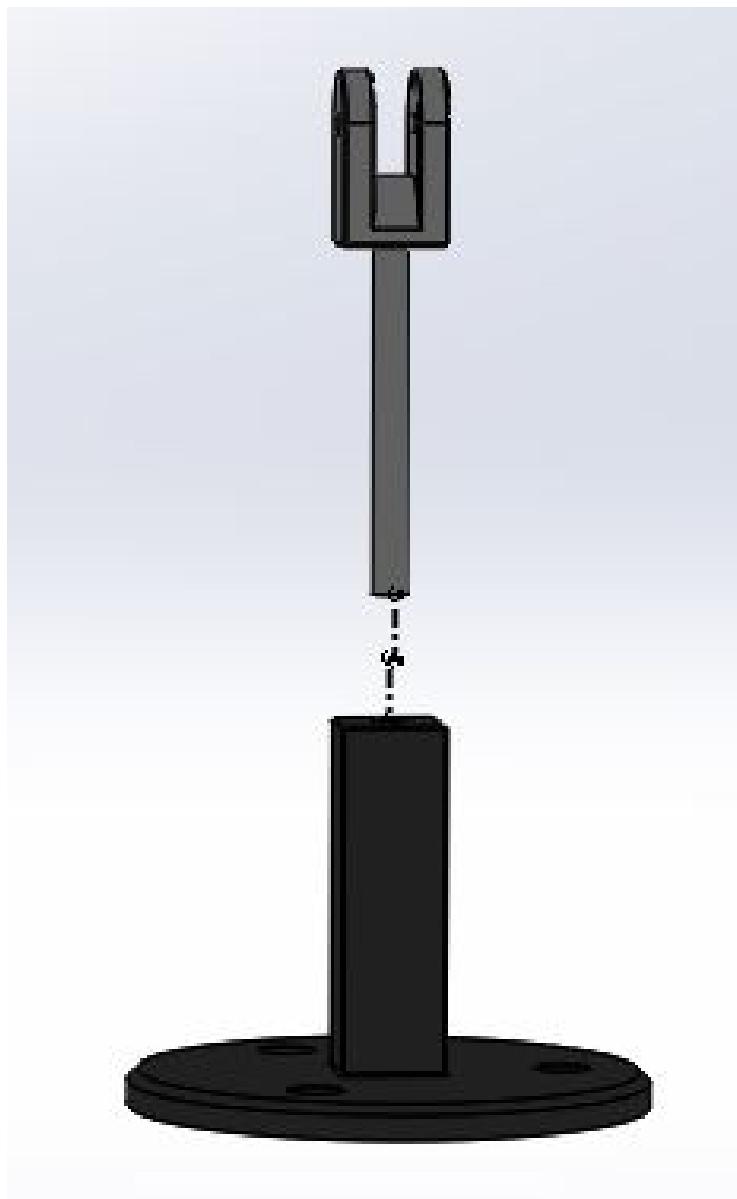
Rodriguez, Juan: Assembly Step 1
